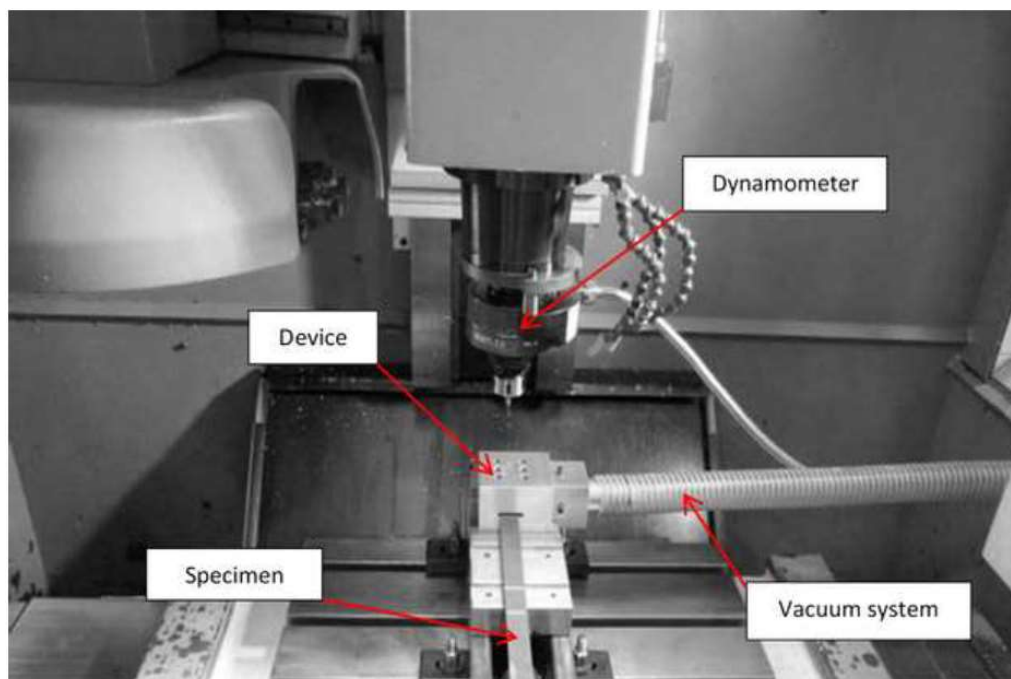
Machining centre used for drilling tests, showing Dynamometer Kistler 9123C and vacuum system for chip collection.
